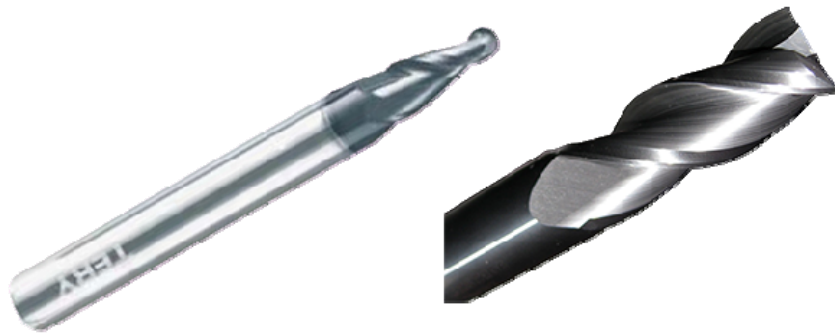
Example of Milling Bits used for finned plate Left: Taper ball end mill. Right: Flat endmill.
